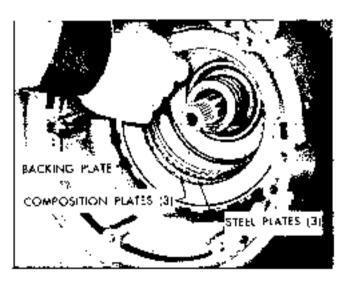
Removing Intermediate Backing Plate and Chirch Plates
